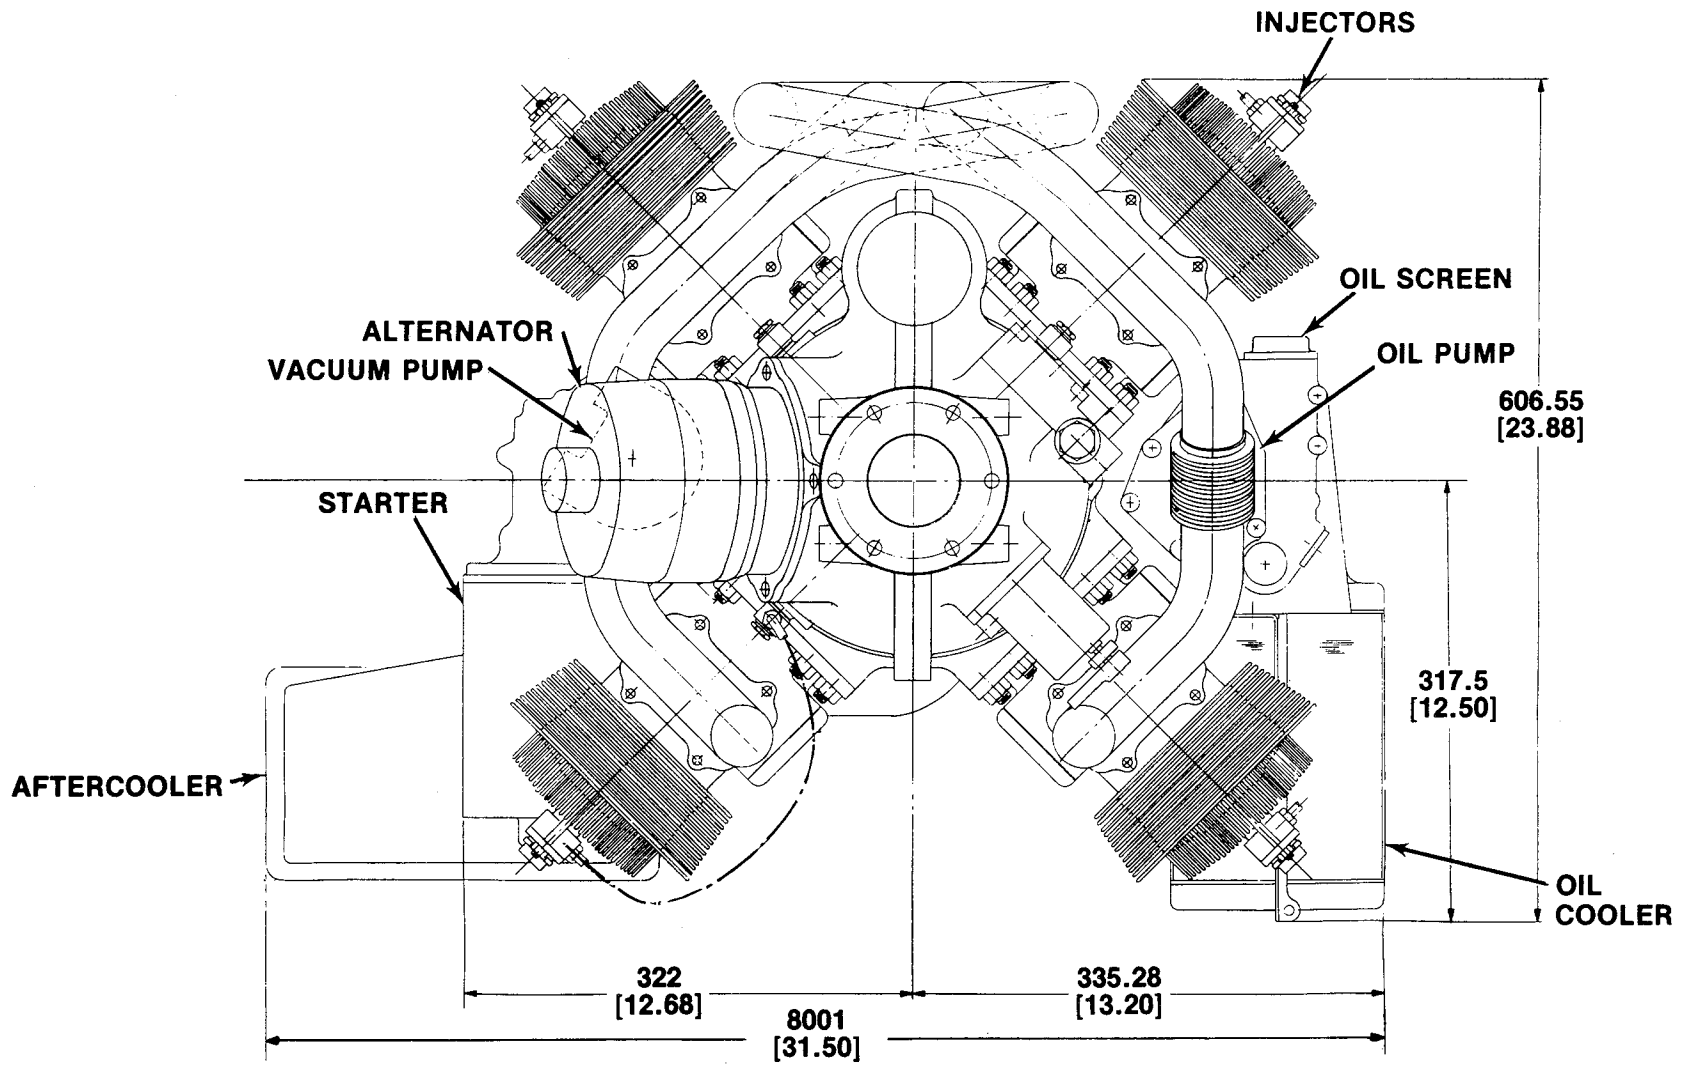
149kW AIRCRAFT DIESEL—FRONT VIEW
